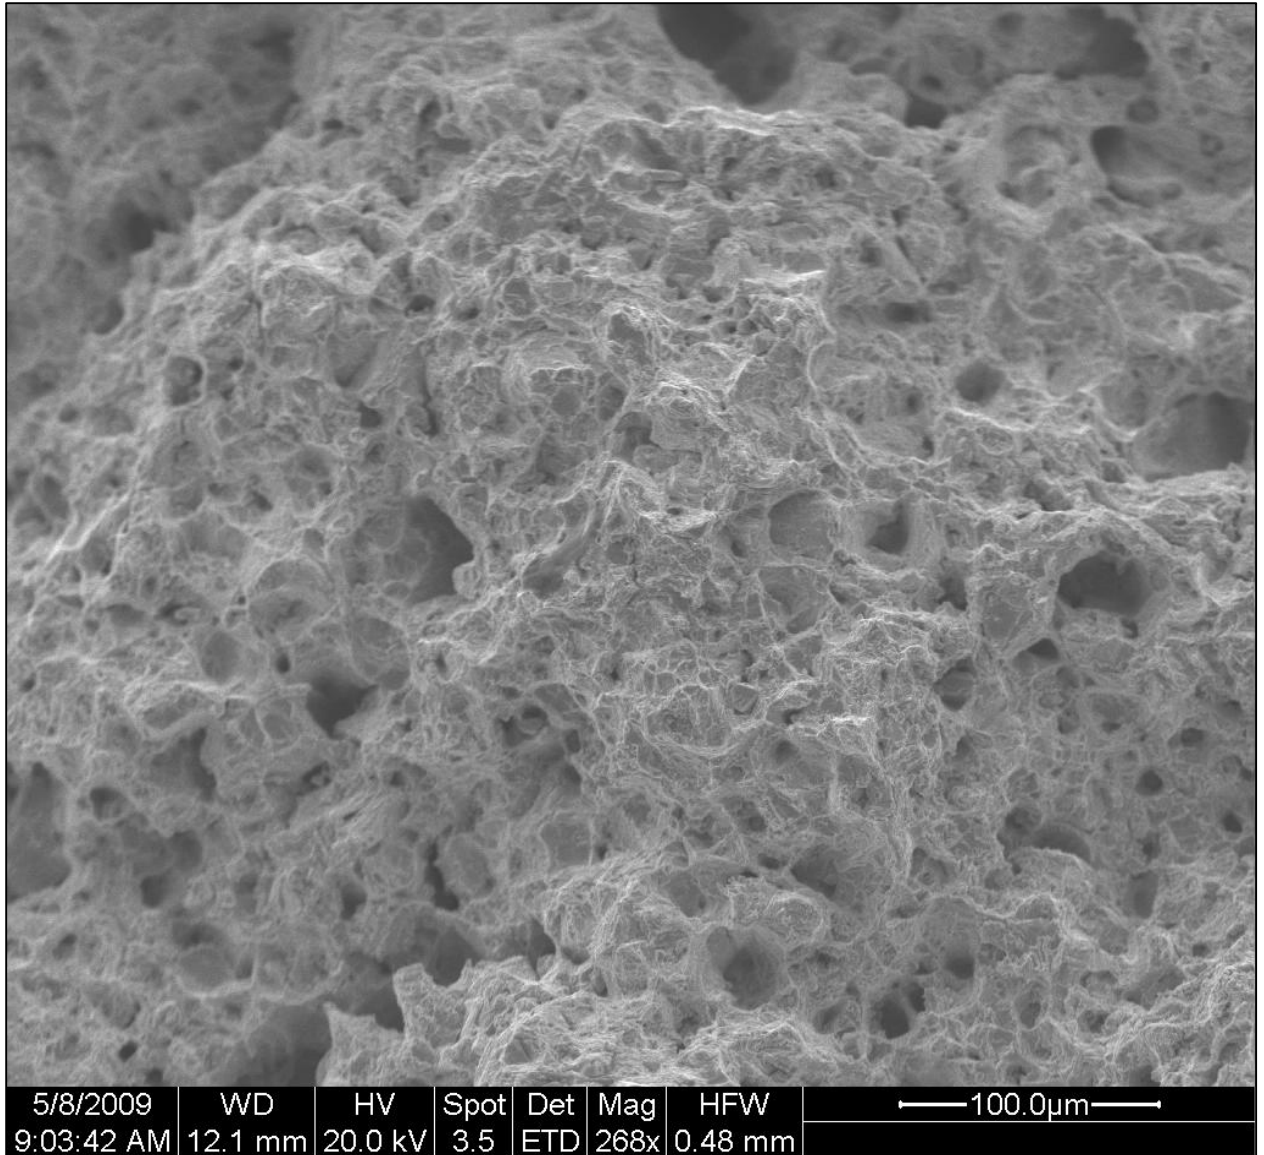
Inconel 718 On-cooling 1870° F fracture surface. Ductile rupture mode dominates.
